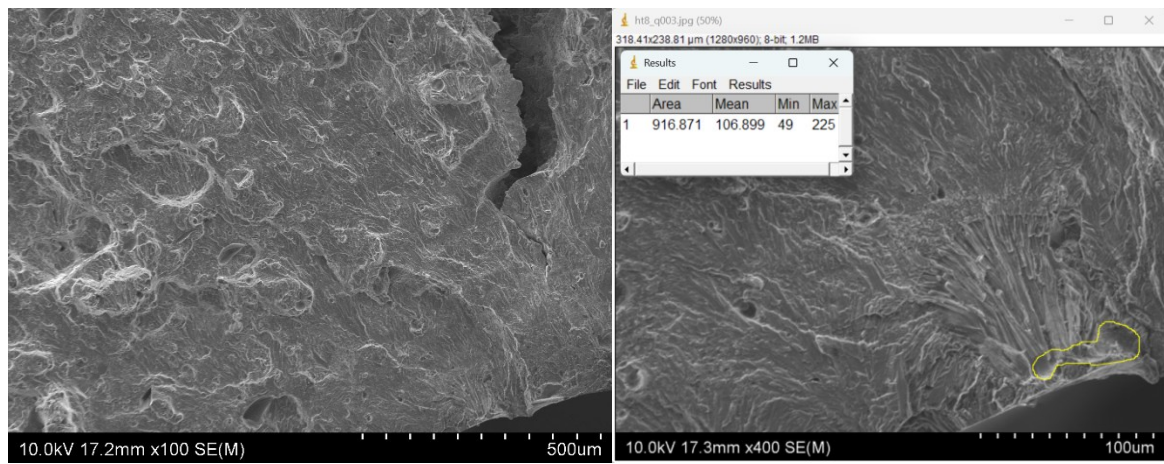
Fracture surface of sample CD//BD-HT-4 a) x100, b) x400.
